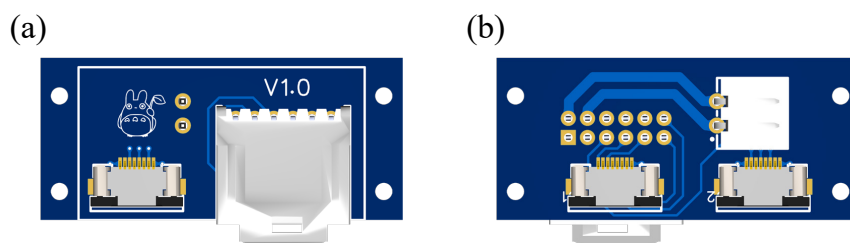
Structure of the interface board: (a) Top view; (b) Bottom view.
